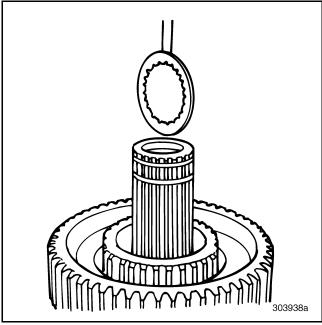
Installing Internal-Toothed Thrust Washer (T313L/T318L Shown)
